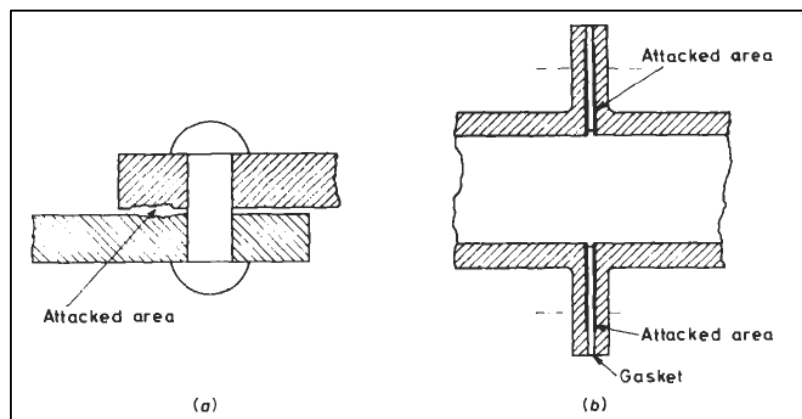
Crevice corrosion (a) Crevice caused by metal-to-metal contact; (b) Crevice due to design [13].
